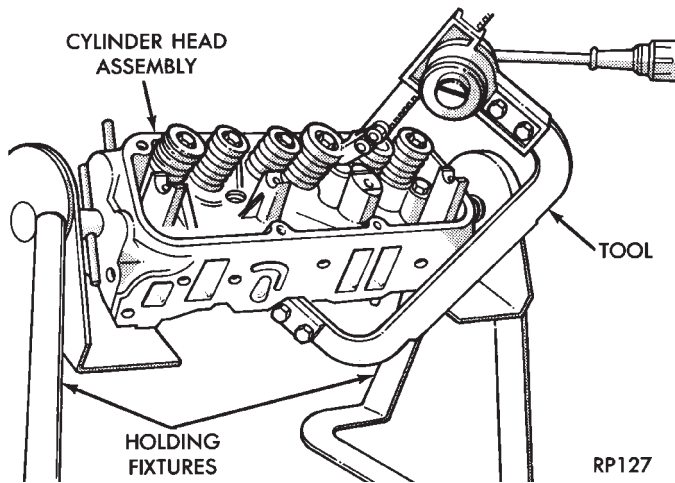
Compress Valve Springs with Special Tool C-3422-B with Adapter 6412
